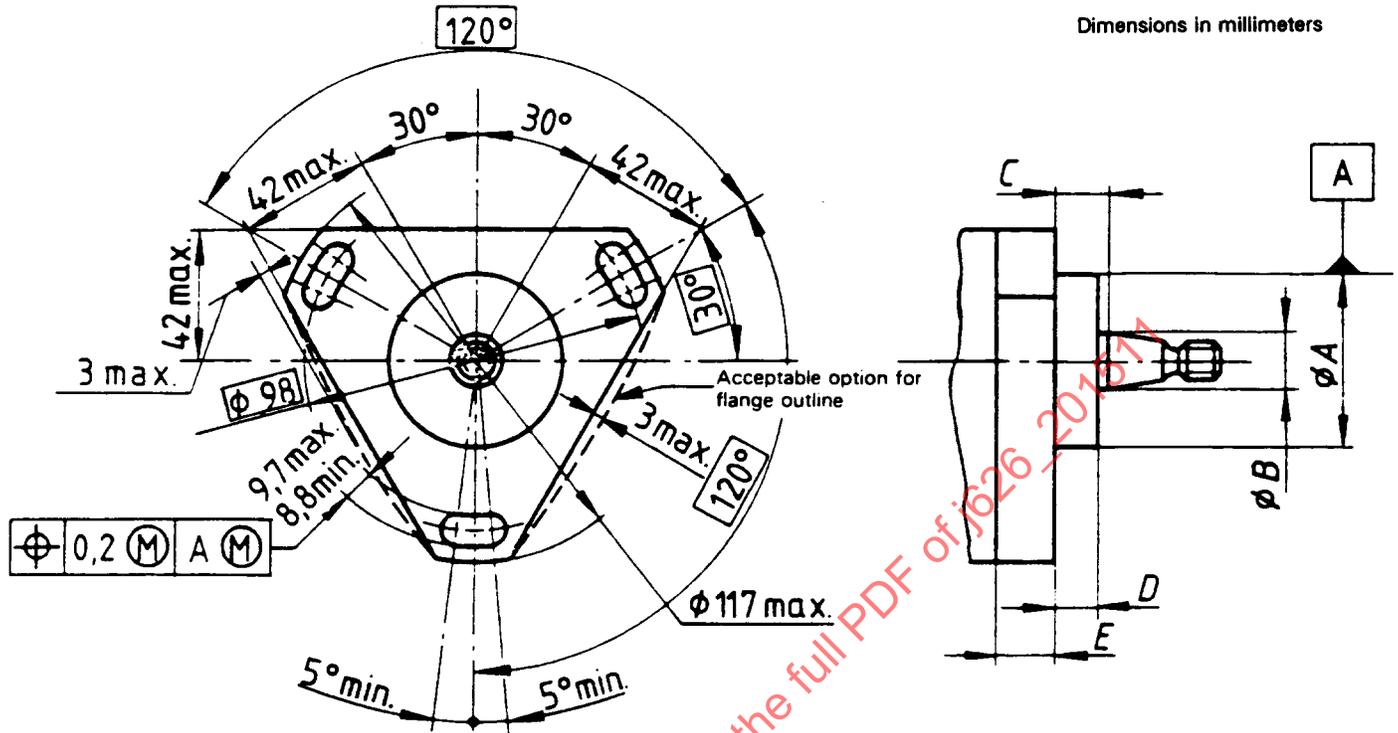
FUEL INJECTION PUMPS—TYPE 2 END-MOUNTING FLANGE
